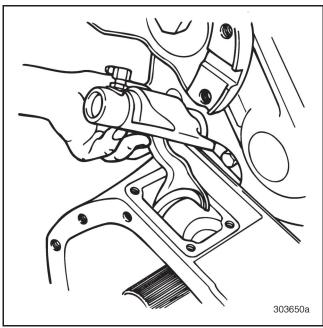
Removing Air Shifter Housing and Shift Fork Assembly
